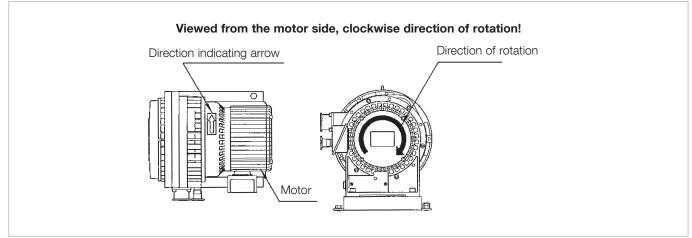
Checking the direction of rotation after having provided the wiring
